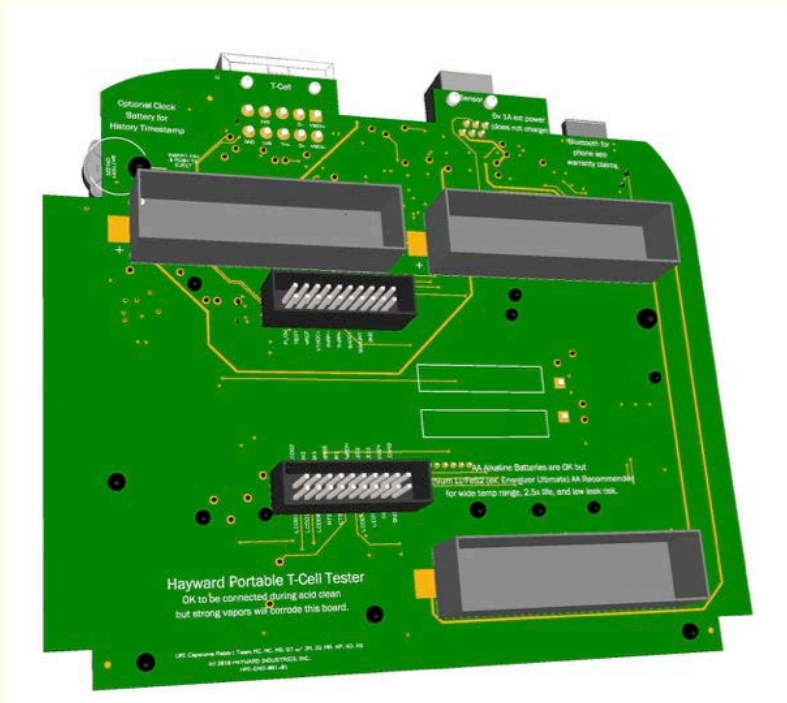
Shown above is the back of the custom printed circuit board (PCB).
